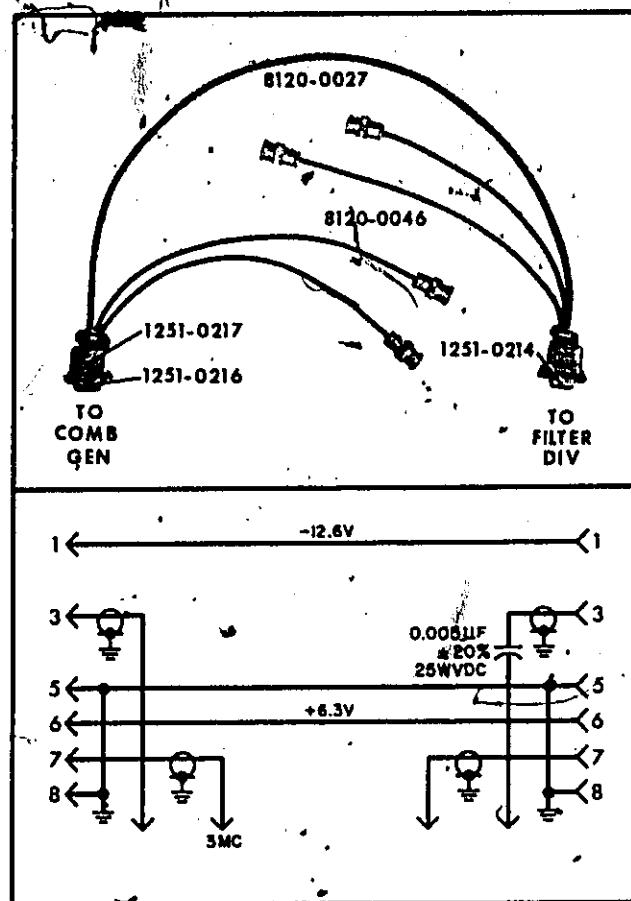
Extension Cable used to Check Comb Generator and Filter/Divider Modules
